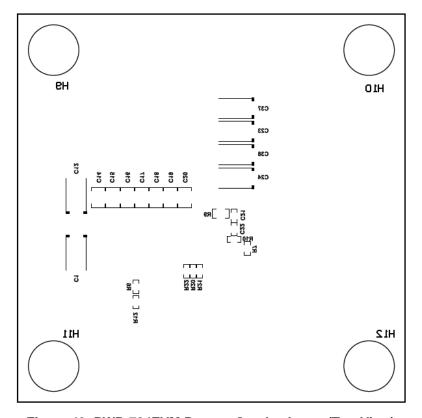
PWR-784EVM Bottom Overlay Layer (Top View)
